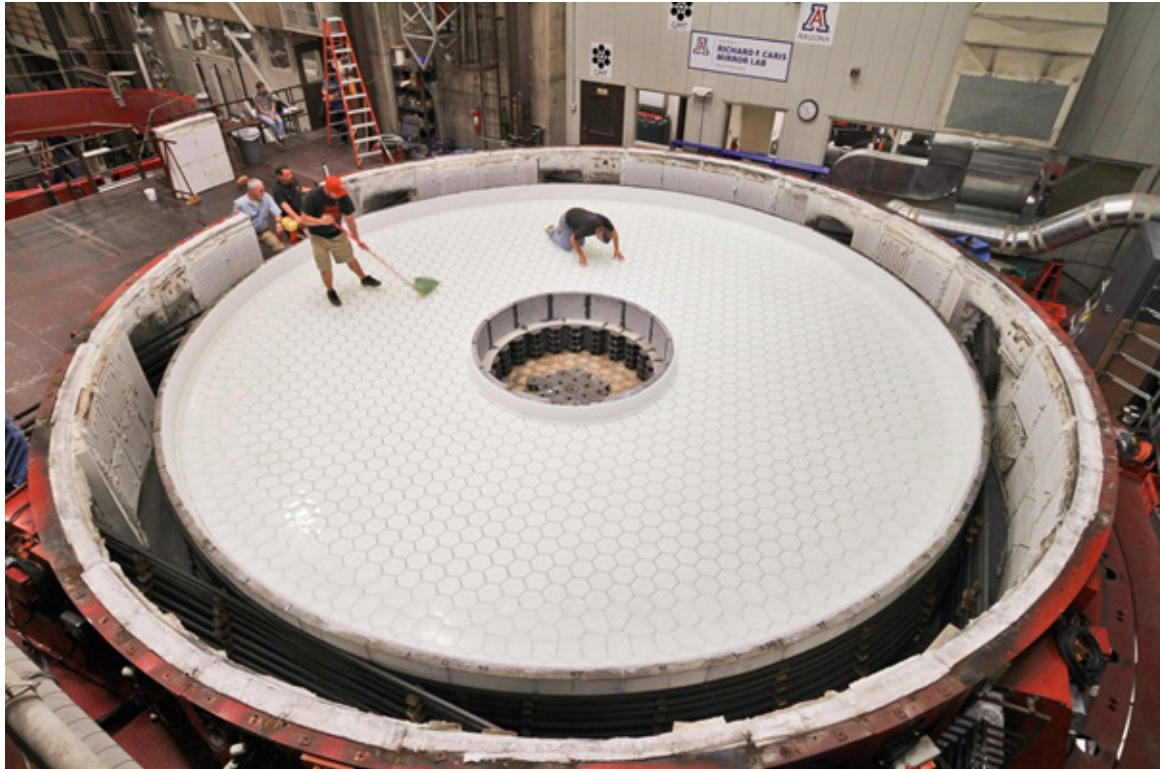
The Giant Maghellan telescope mirror being produced. The weight-reducing honeycomb mould structure can clearly be discerned.
